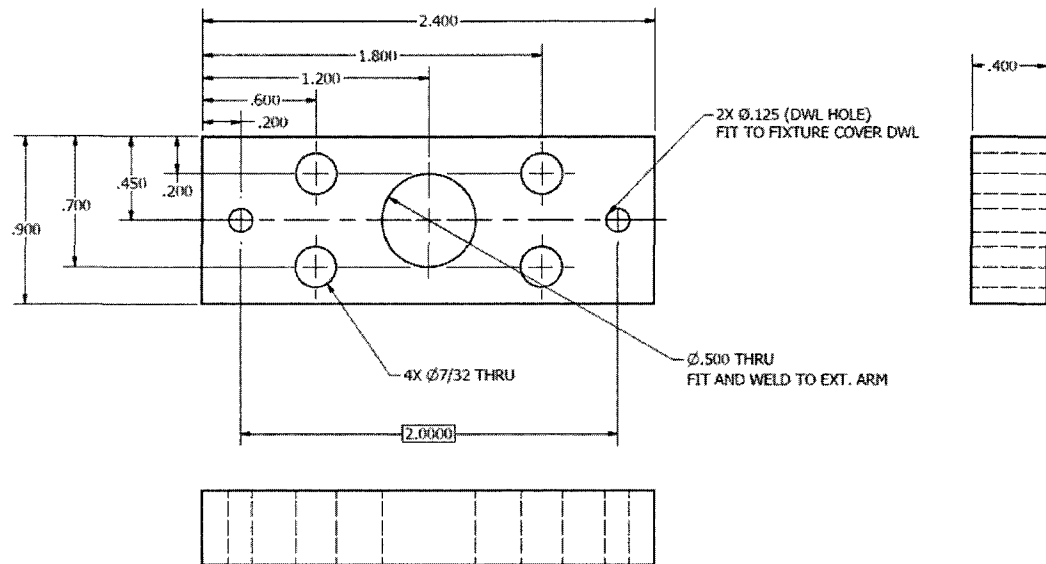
Centered System Outer Arm Adapter CAD Drawing
